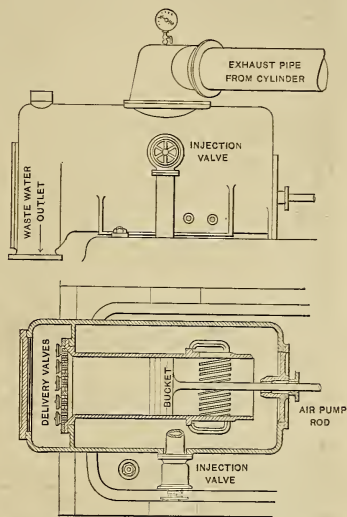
ELEVATION AND PLAN OF LONG-STROKE AIR PUMP MADE BY MESSRS. POLLIT & WIGZELL, LTD.
